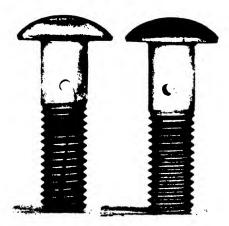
Cracked bolts. Left: Quenching crack. Right: Seam. Etched in 1:1 HC1.
